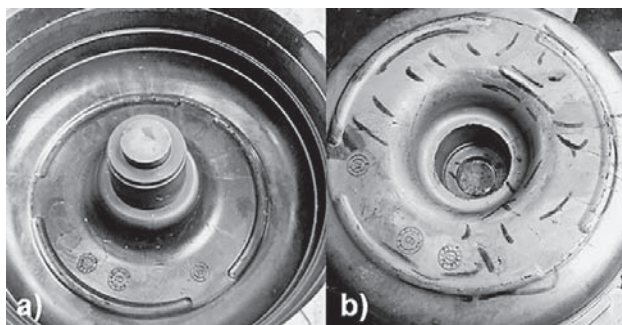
Mold damaged by thermal fatigue and cast produced with the same mold [6]
